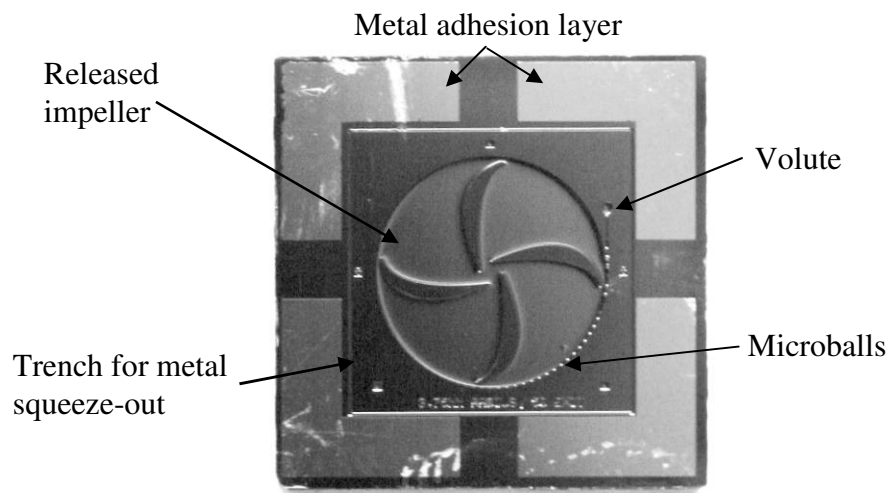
Optical image showing a completed centrifugal impeller and volute.
